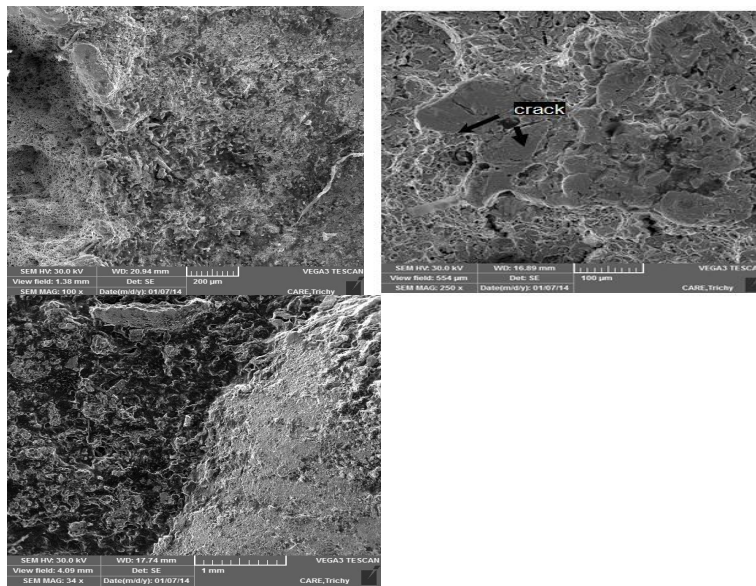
Fractography images of As received, Carburized and carbonitrided tensile fractured specimen
